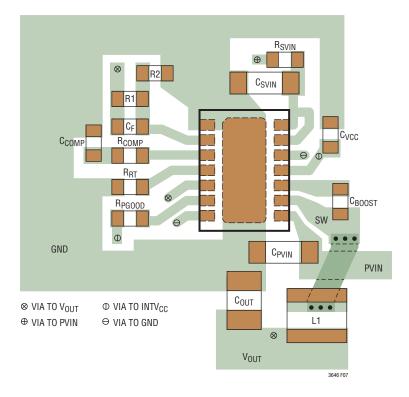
Example of Power Component Layout for DFN Package. Because of the Similar Pinout, MSE Package Layout is Similar
